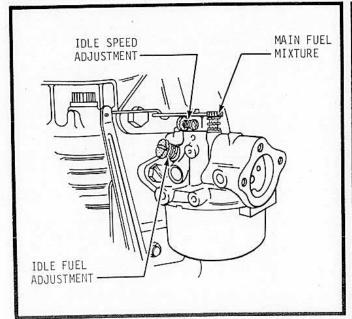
SIDE DRAFT GASOLINE CARBURETOR
